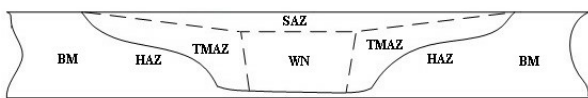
Sketch map of Ti6Al4V friction stir weld.
